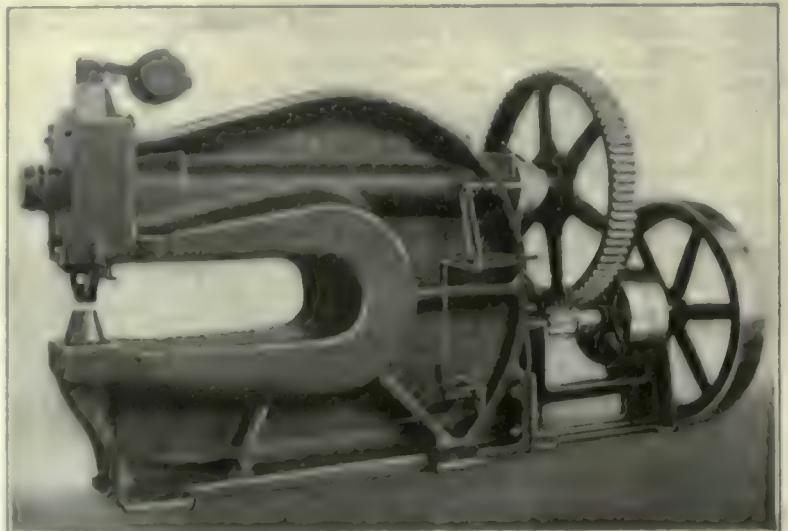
CHAMBERSBURG MECHANICAL CONTROL PUNCHING MACHINE
